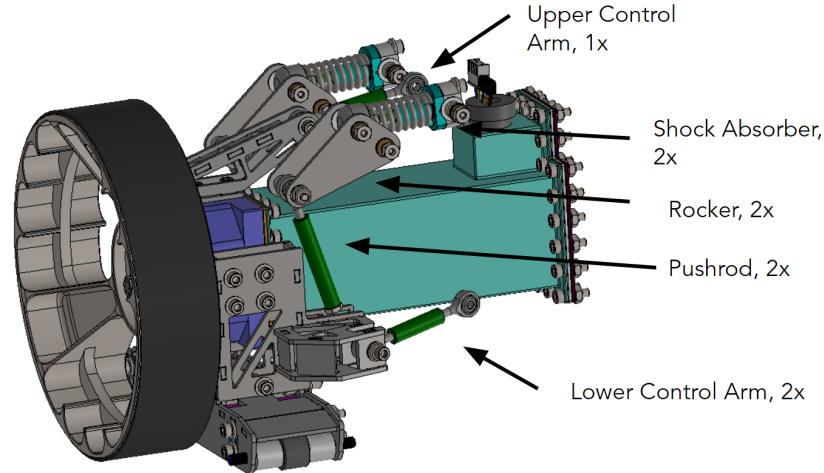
Isometric view of the wheel assembly with the various suspension elements labeled.
